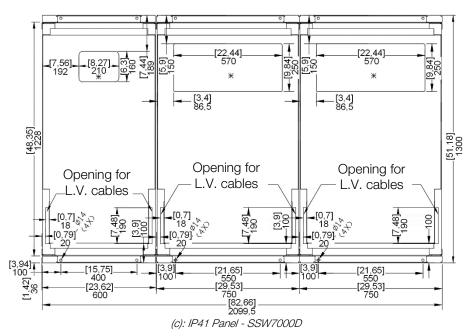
(c): Anchoring of the SSW7000D panel to the floor – dimensions in mm [in]
